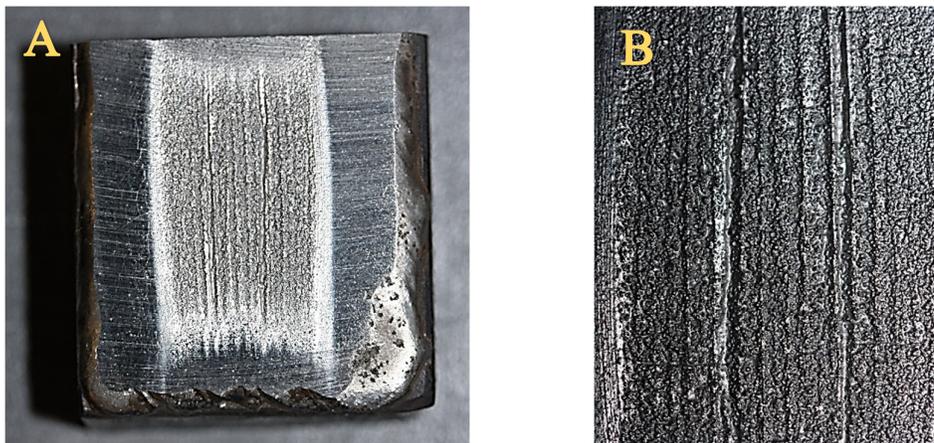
(A) Specimen after G65 abrasion test. (B) Zoom of specimen "A".
